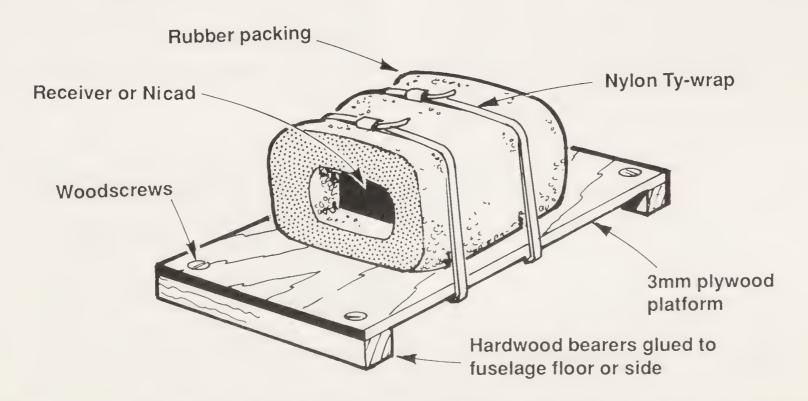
Tie wraps may be used to secure a well-packed receiver or nicad pack to a ply tray. This is a particularly useful method when equipment has to be mounted in a large, cavernous fuselage.
